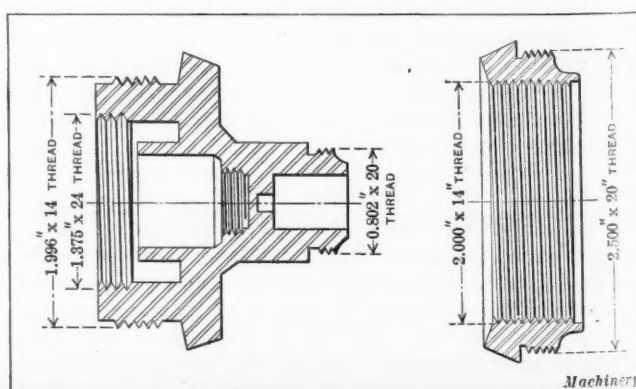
Work threaded by Combination Threading Die and Tap shown in Fig. 3
